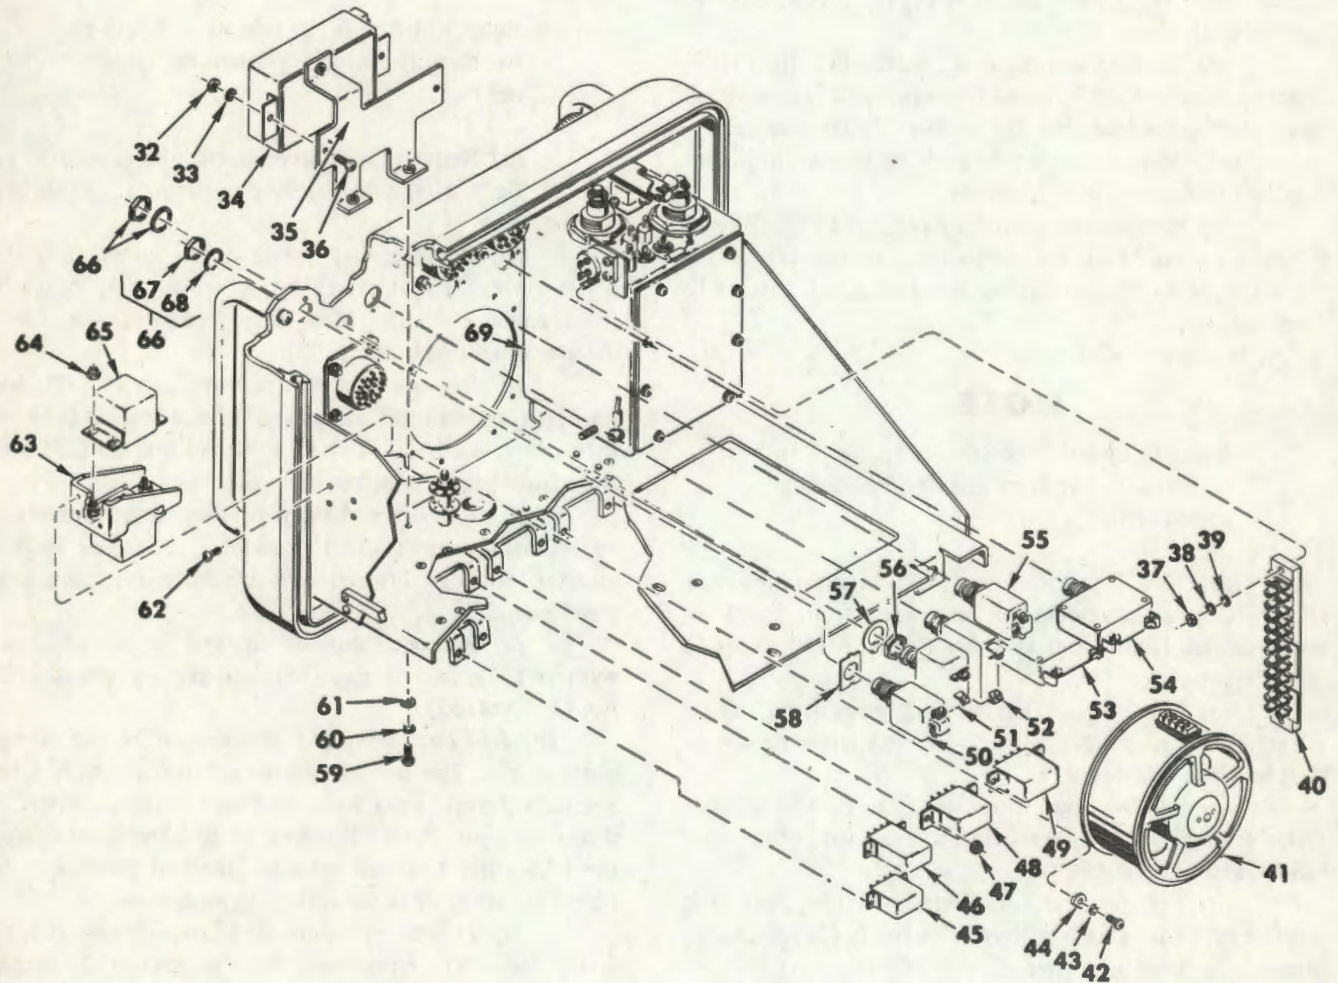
Power supply, partially exploded view - sheet 2 of 3.
